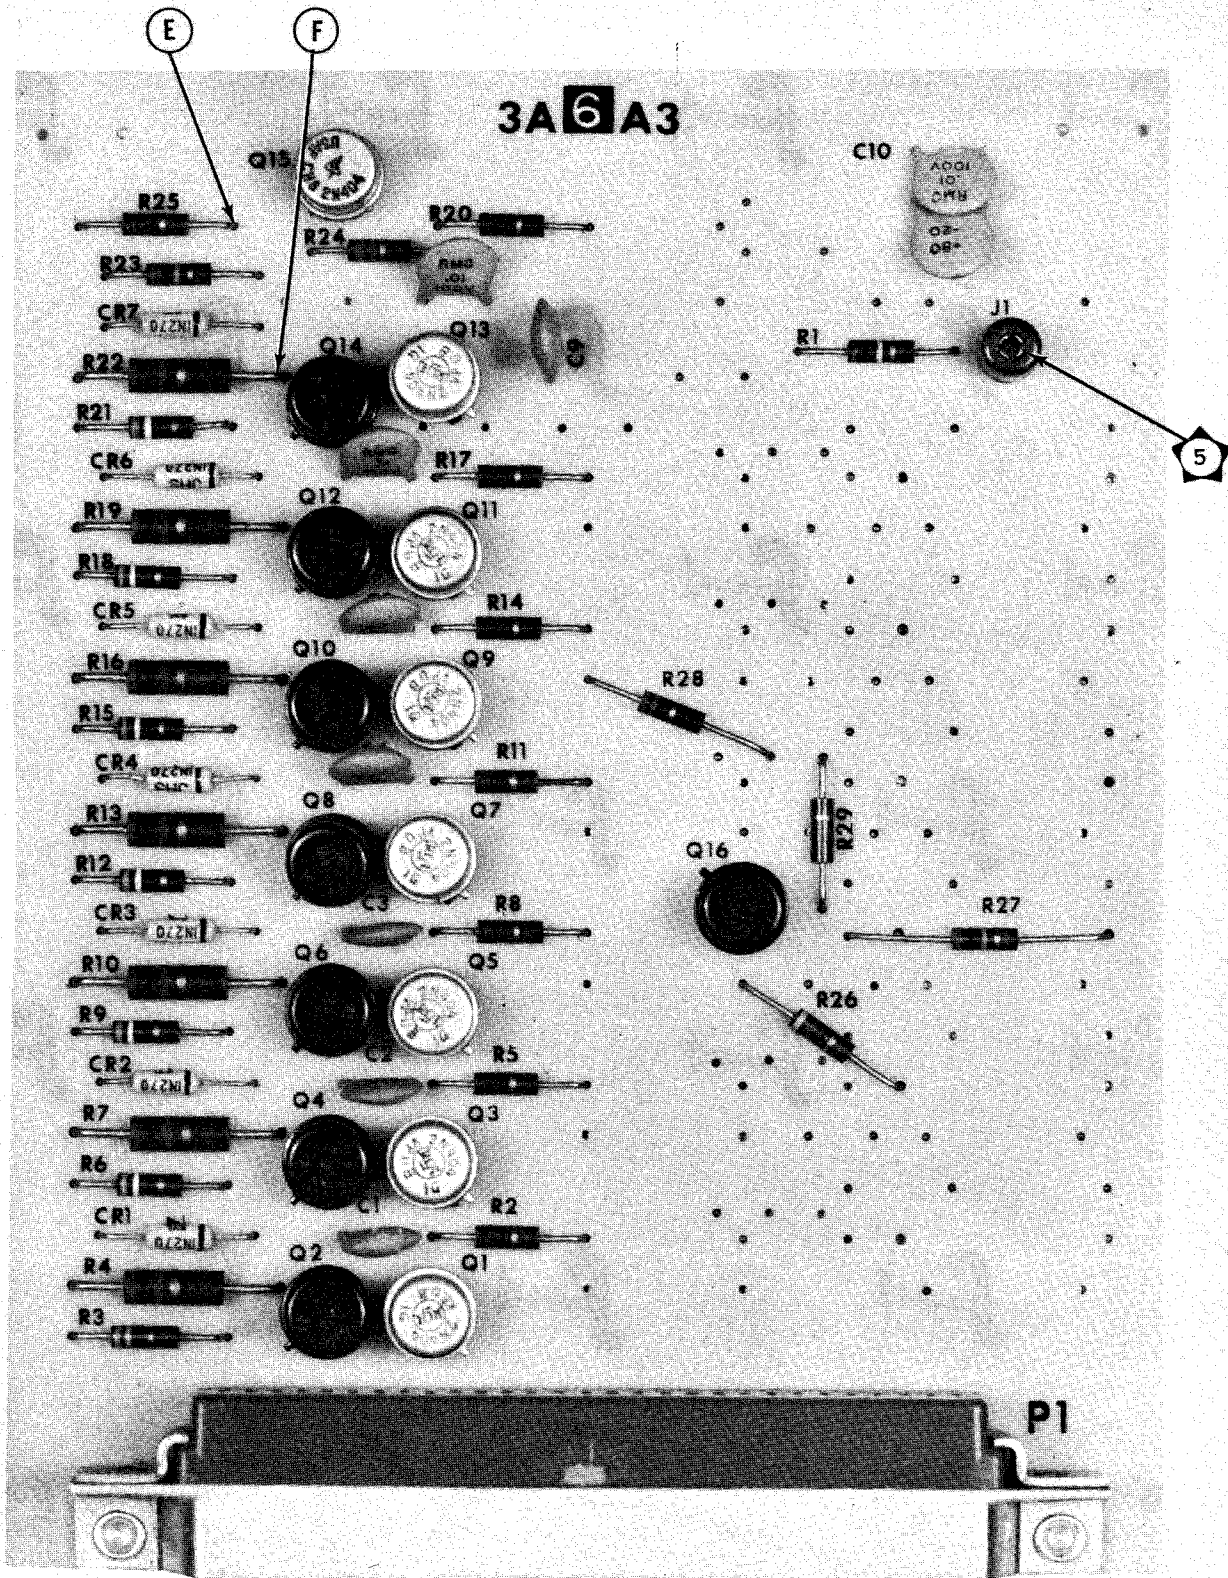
Transmitter Code Converter, Printed Circuit Board A3
